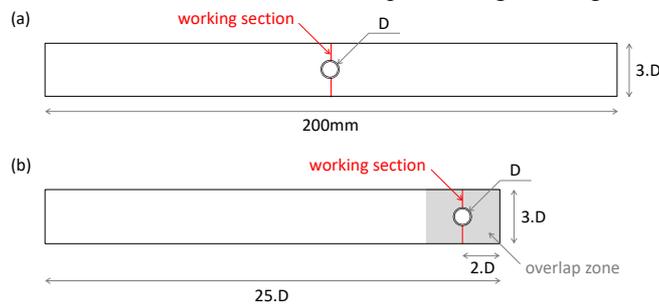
Geometry of the samples for (a) open-hole fatigue tests and (b) filled-hole fatigue tests.
